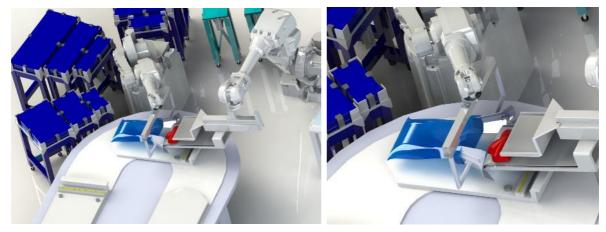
Robotic bagging of primal cut over top of the vacuum sealing machine.
